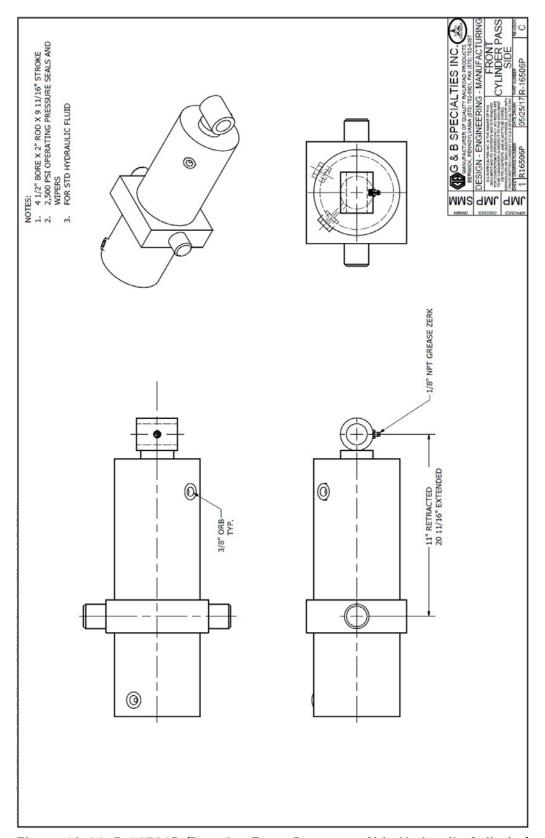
R-16506P (Rotating Front Passenger Side Hydraulic Cylinder)
